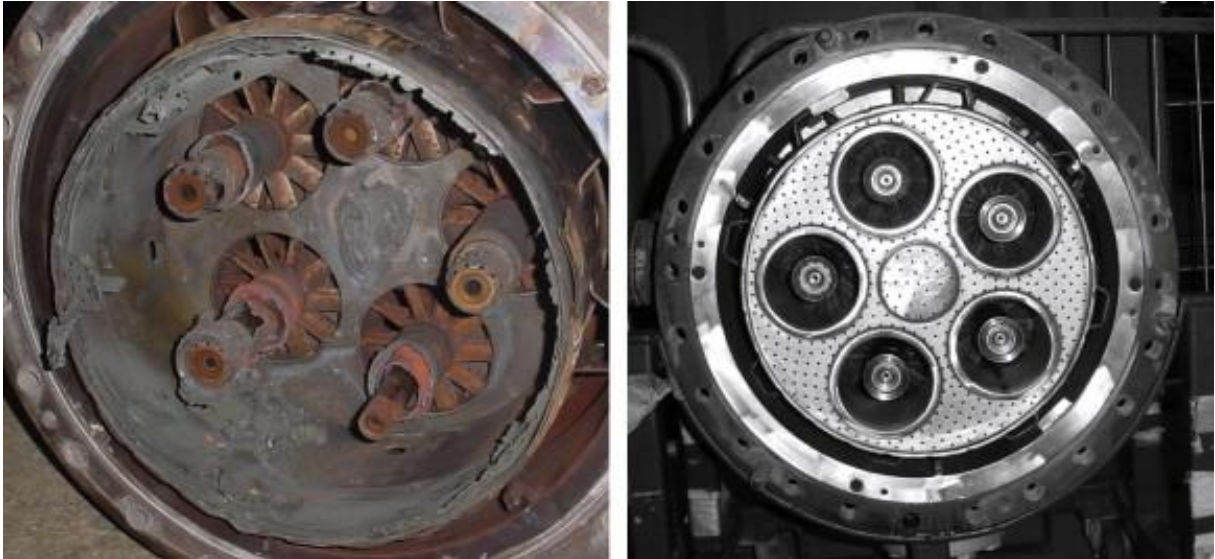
Gas Turbine Burner assembly (left) damaged by combustion instability and new burner assembly (right) (Goy et al., 2005)
